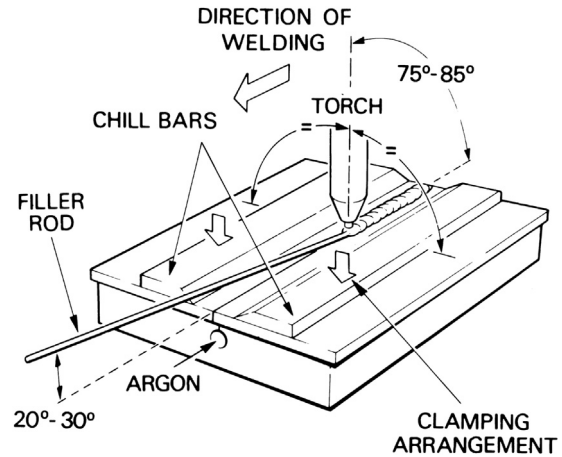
Typical tungsten inert gas welding details. (Source: Rolls Royce.)
